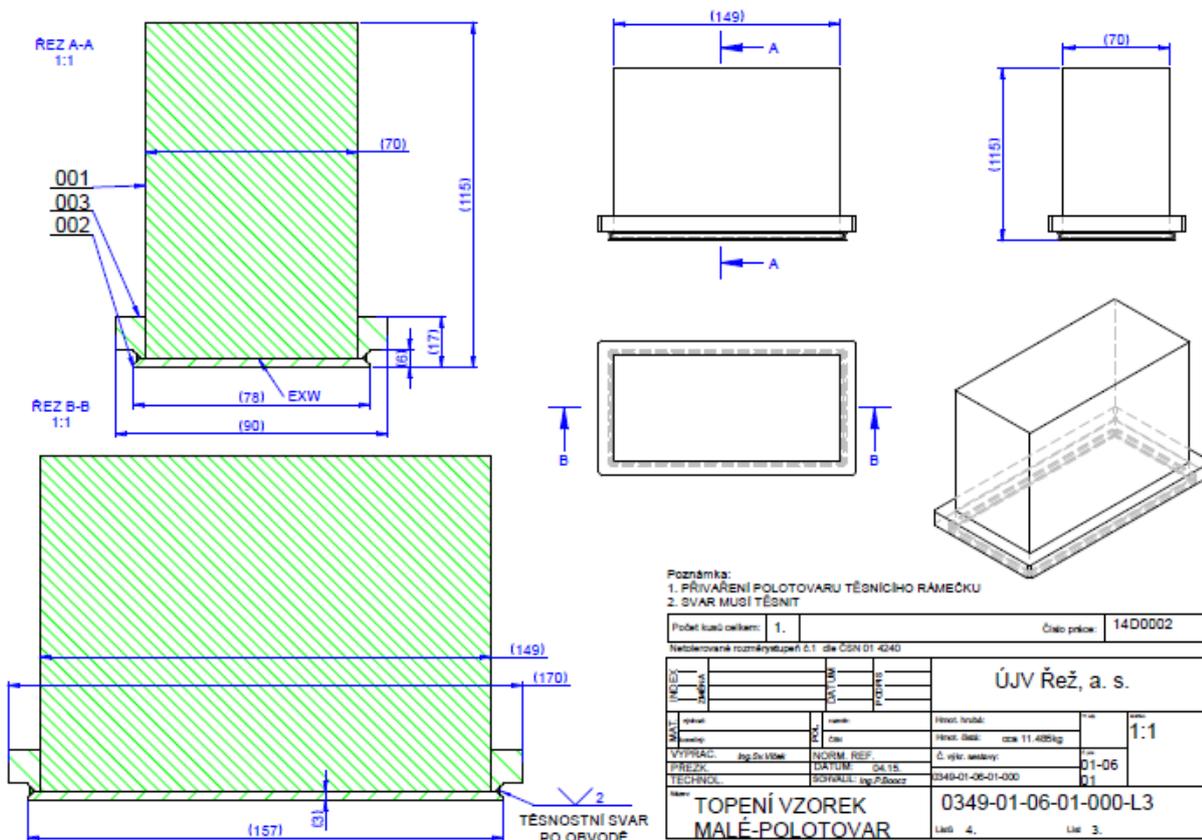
Dimension of small scale sample. Steel surface explosively welded with Cu bloc.
